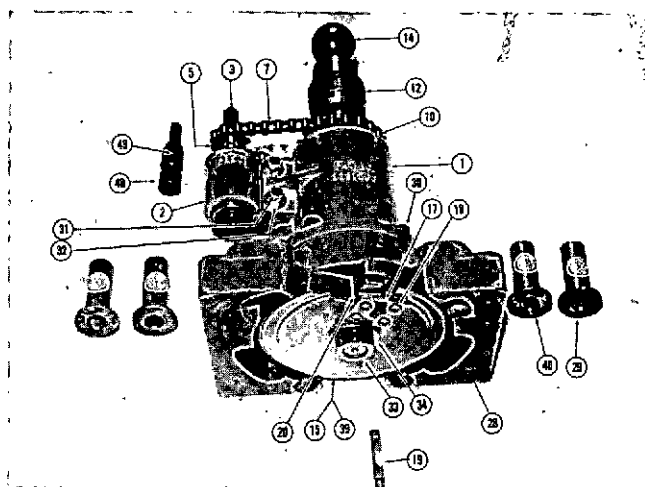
, V40172. ST-1168 Boring Tool
